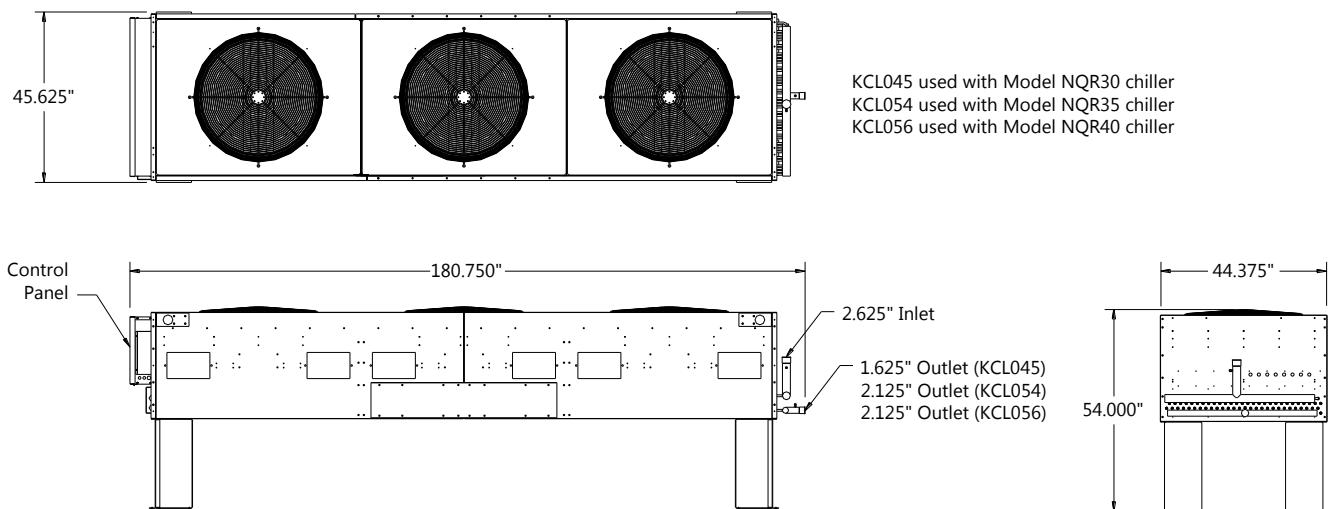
KCL045, KCL054, and KCL056 General Dimensions Drawing
